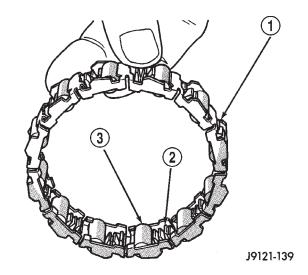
Overrunning Clutch Rollers, Springs, Retainer
